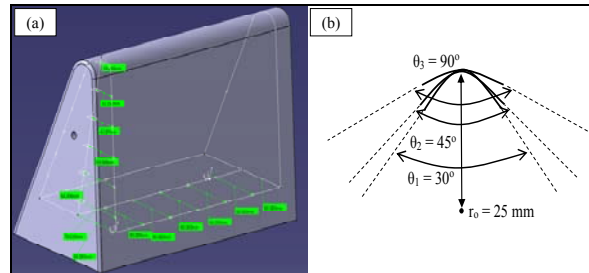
(a) S275JR carbon steel tool geometry and (b) the various corner angles.
